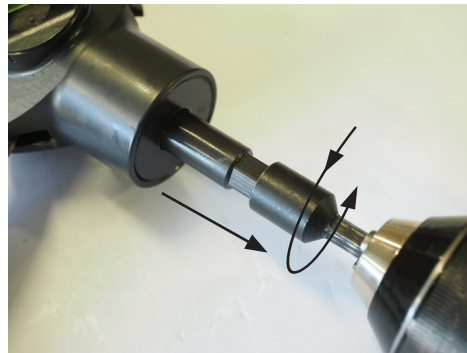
If cutters are pre-installed, use your drill to ensure that both the hex drive and cutter end of the cutter assembly are fully retracted.
